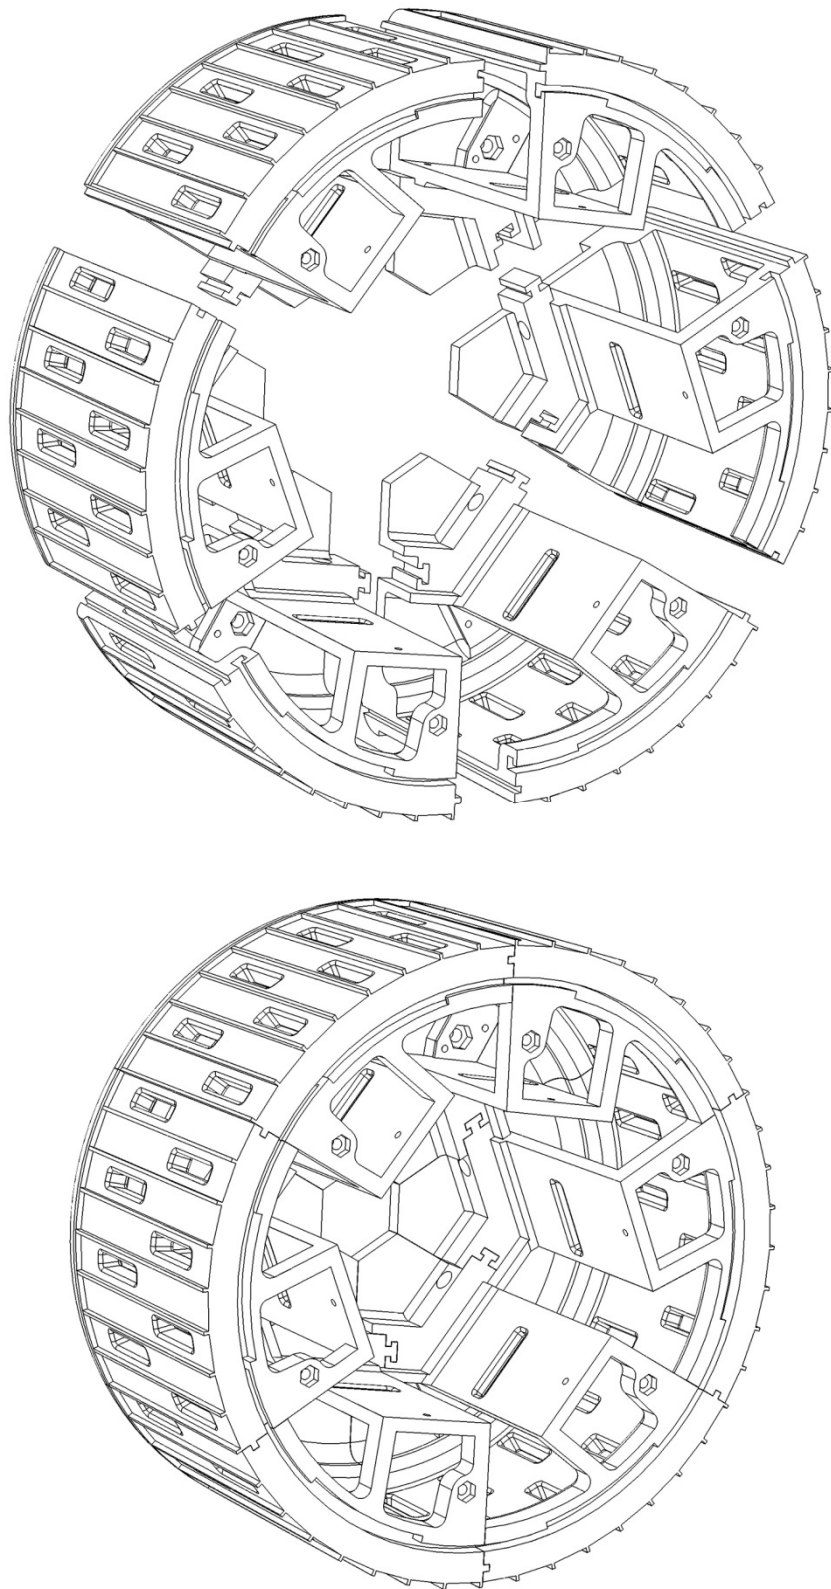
Complete wheel structure comprising of 6 Wheel Segments. The Wheel Segments were designed to slot together, with 6 required to make a complete wheel.
